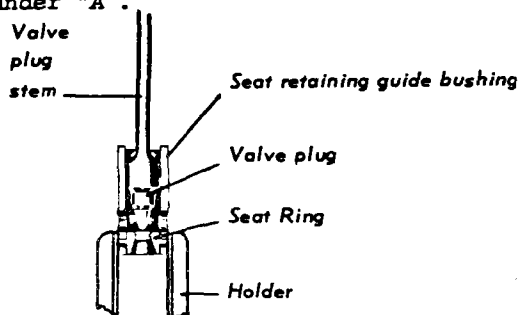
Place seat ring in a suitable holding device (that will not distort seat ring). Position seat retaining guide on seat ring. (In the case of "I" Trim - Classes DIS, etc. - be sure to assemble the valve plug guide and throttling sector in their respective positions before lapping, regardless of procedure followed).
